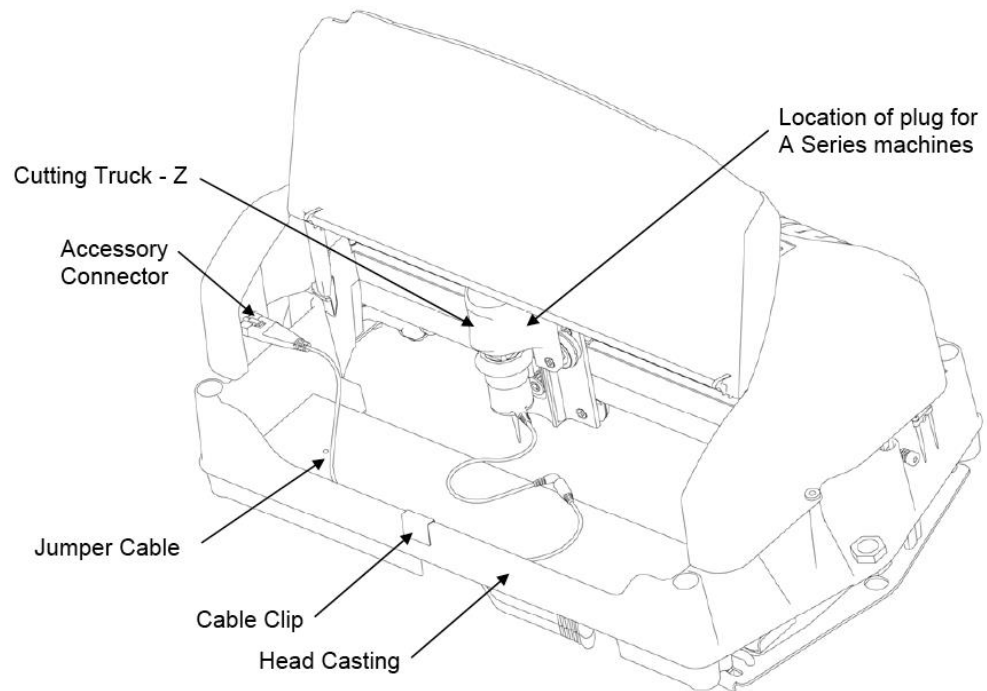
PLUGGING IN THE PROBE IN MOST B-SERIES MACHINES
